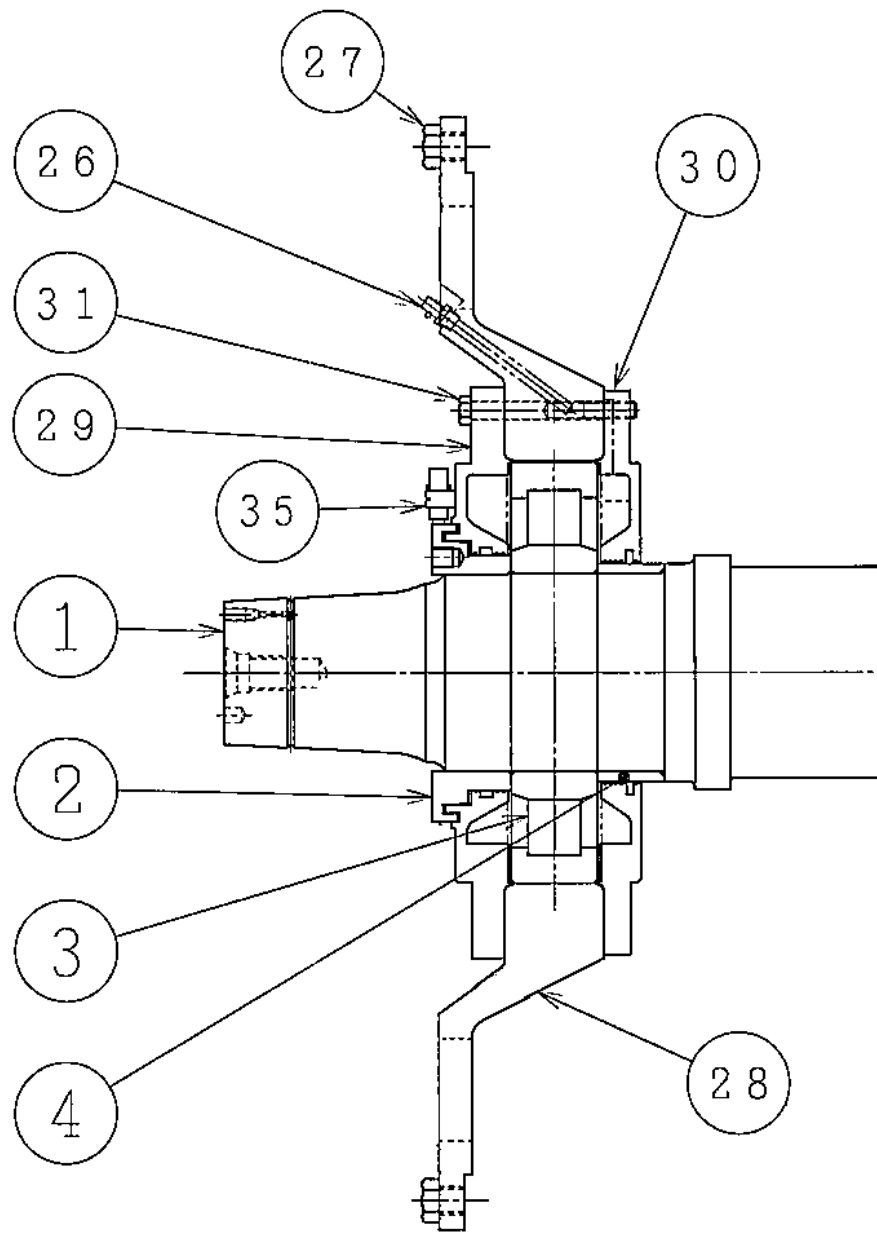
Assembly of Load Side of Roller Bearing.
